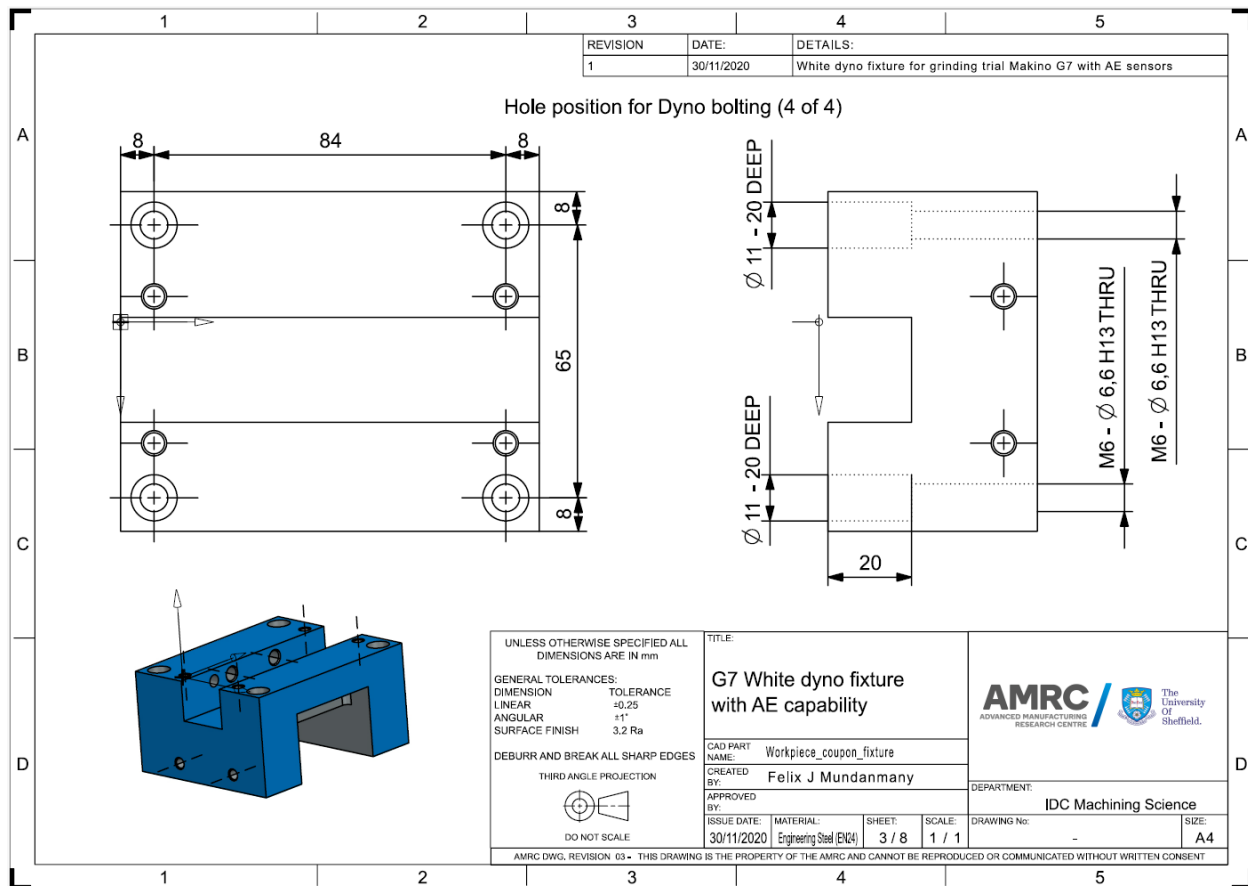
Drawing showing the 4 counter bore M6 holes which allows for the workpiece to be fastened to the mounting plate of the dynamometer.
